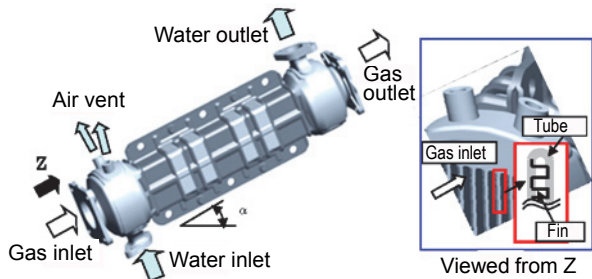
External view and structure of the exhaust gas recirculation cooler
